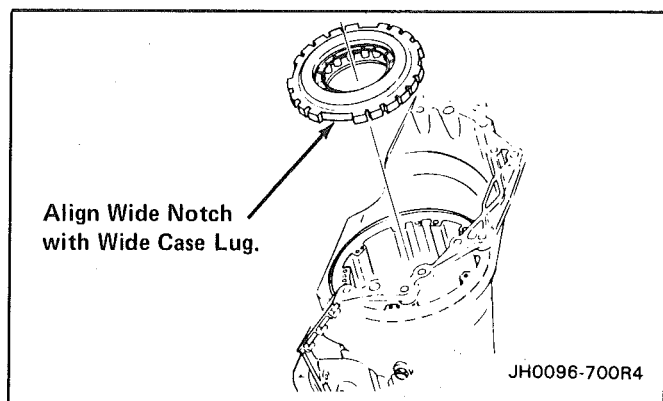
Lo and Reverse Support and Roller Asm. Installation
